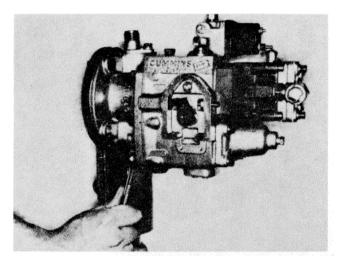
G-9. Removing Front Drive Cover from AFC Pump
